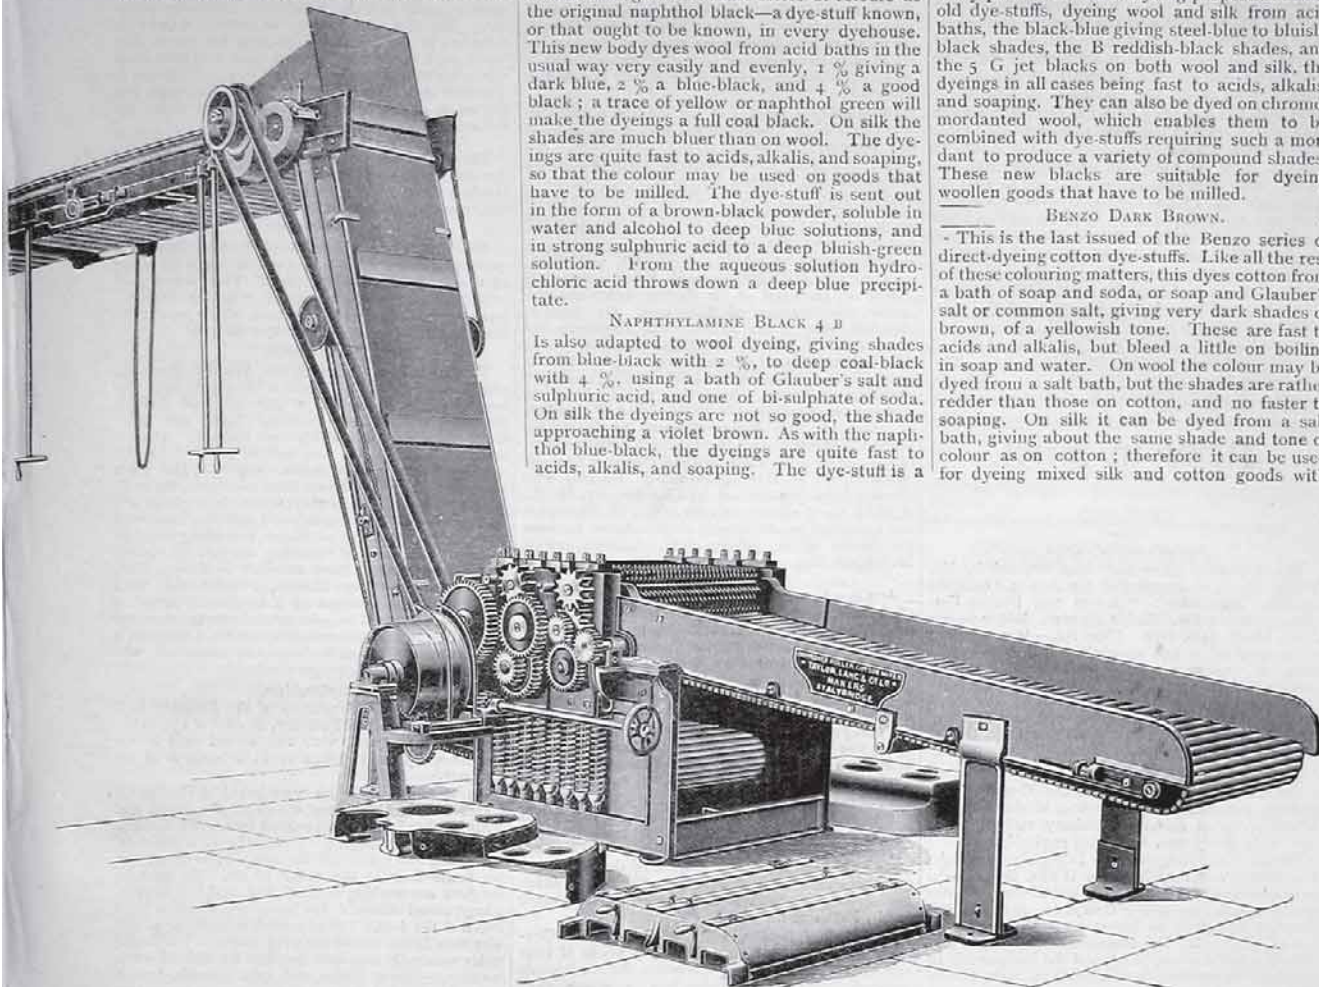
IMPROVED BALE BREAKER WITH ELEVATING LATTICE.—MESSRS. TAYLOR, LANG, AND CO., LIMITED, STALYBRIDGE.
